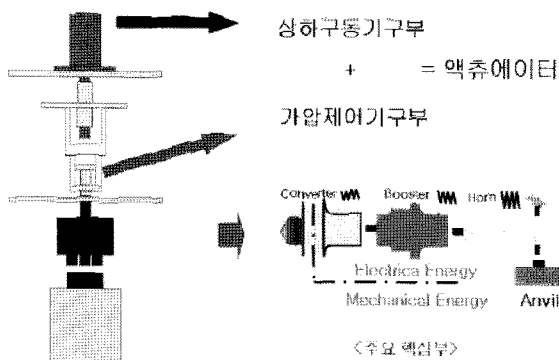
Structure of ultrasonic metal welding machine
